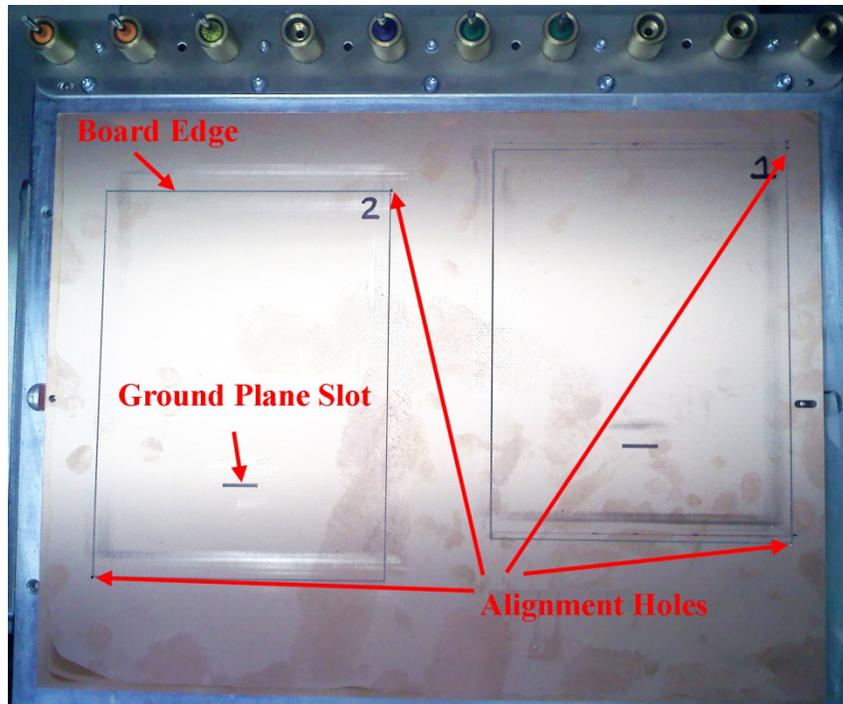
LPKF Milling Machine: Design 1 and 2 Ground Planes
